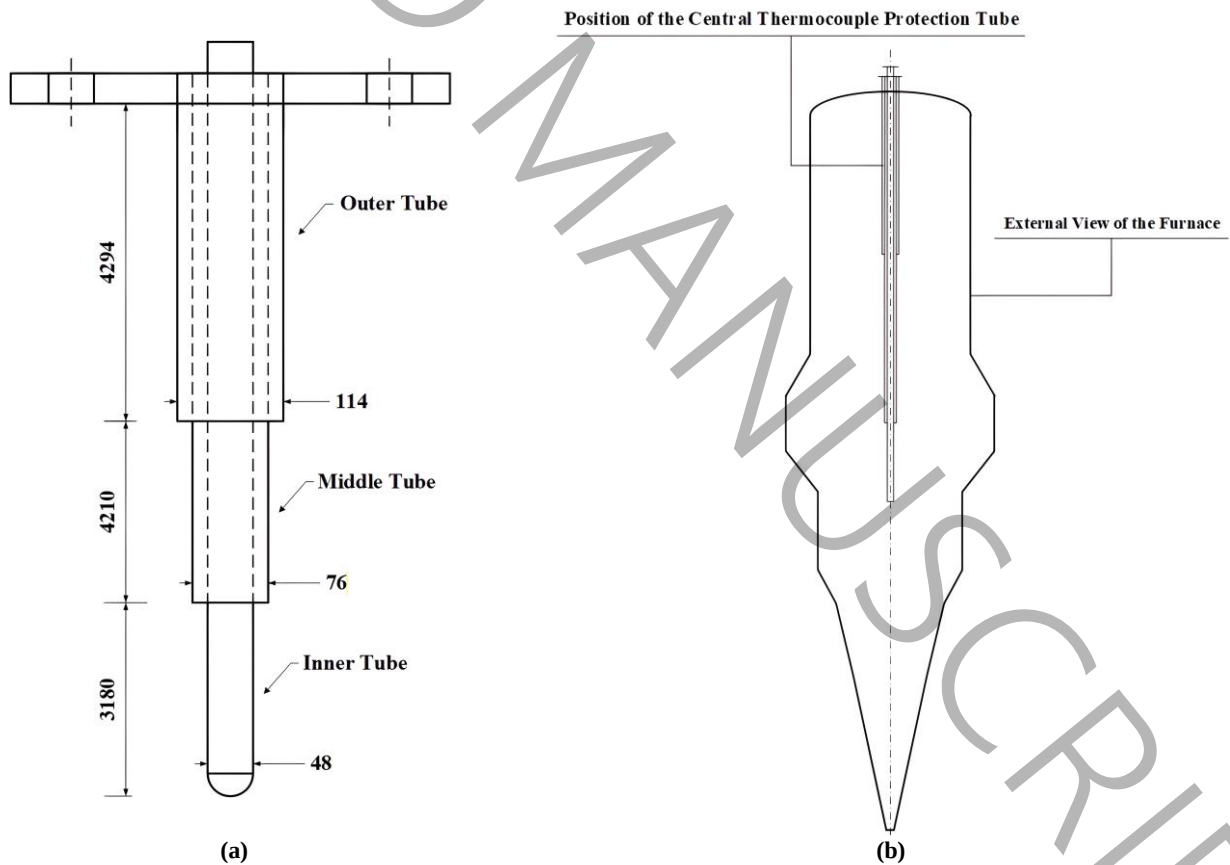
(a) Geometry of the thermocouple protection tube (b) Position of the central thermocouple protection tube inside the furnace (all dimensions are in millimeters).
